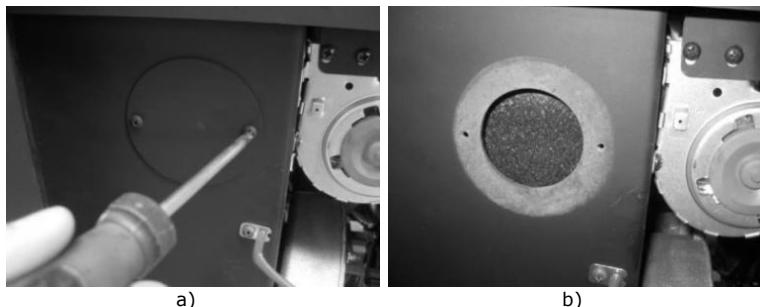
Example K100 a) Remove the screws; b) Remove the cover
